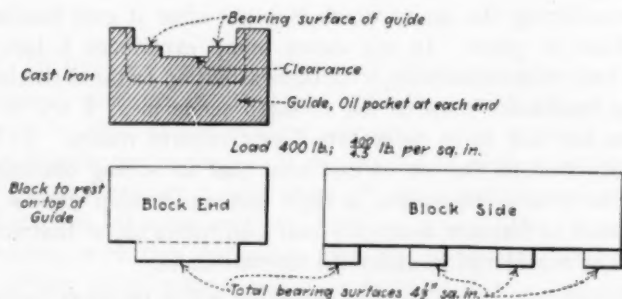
BLOCK AND GUIDE FOR TESTING RUBBING SURFACES
